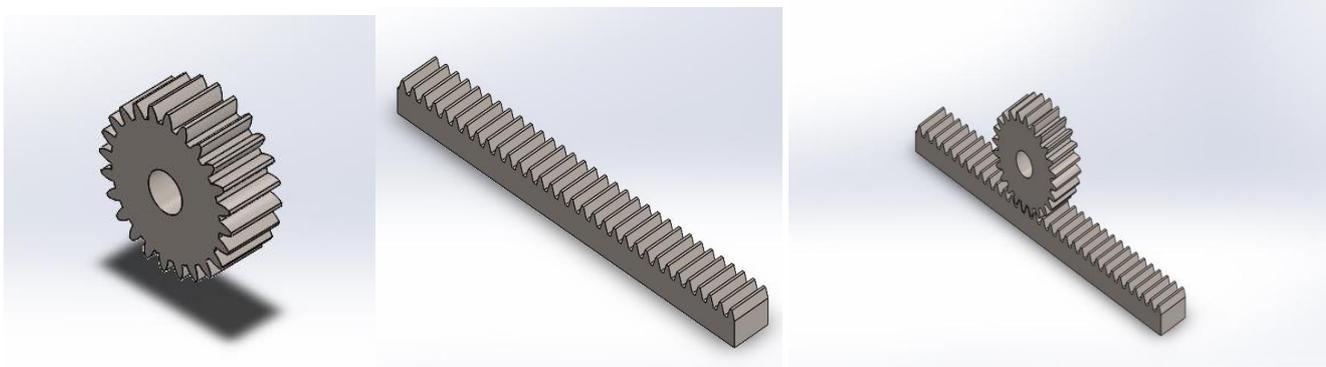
CAD model of Rack and Pinion; Fig. 3.2. Meshed assembly of Rack and Pinion
